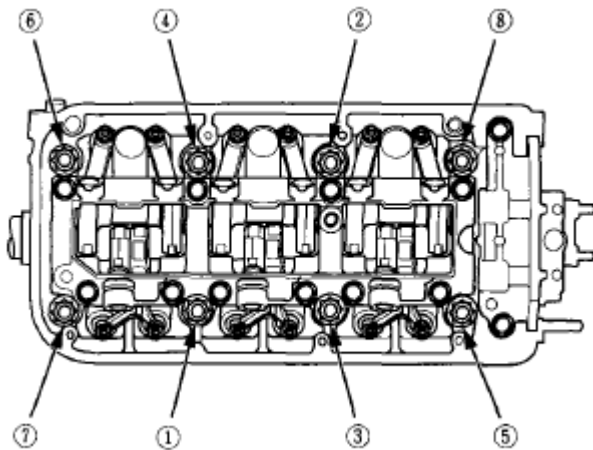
Identifying Cylinder Head Bolts With Tightening Sequence (Rear)
